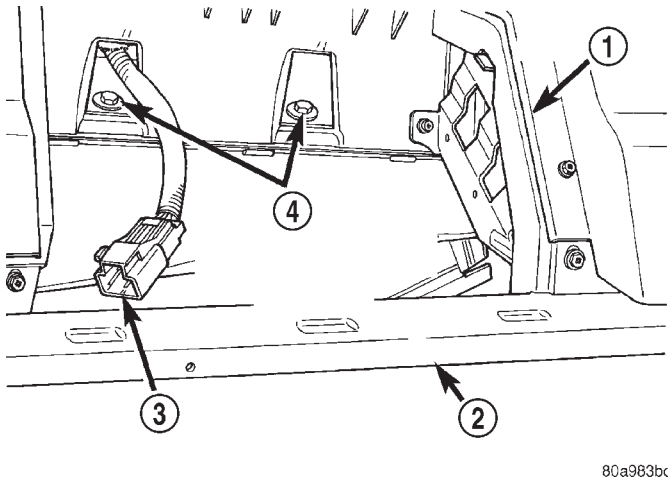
Passenger Side Airbag Module Lower Bracket Screws
